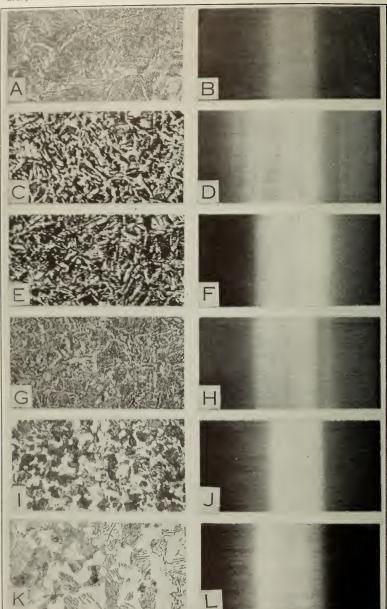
Microstructures and surface finishes of chromium-vanadium (S. A. E. 6140) steel cut in the lathe tests
